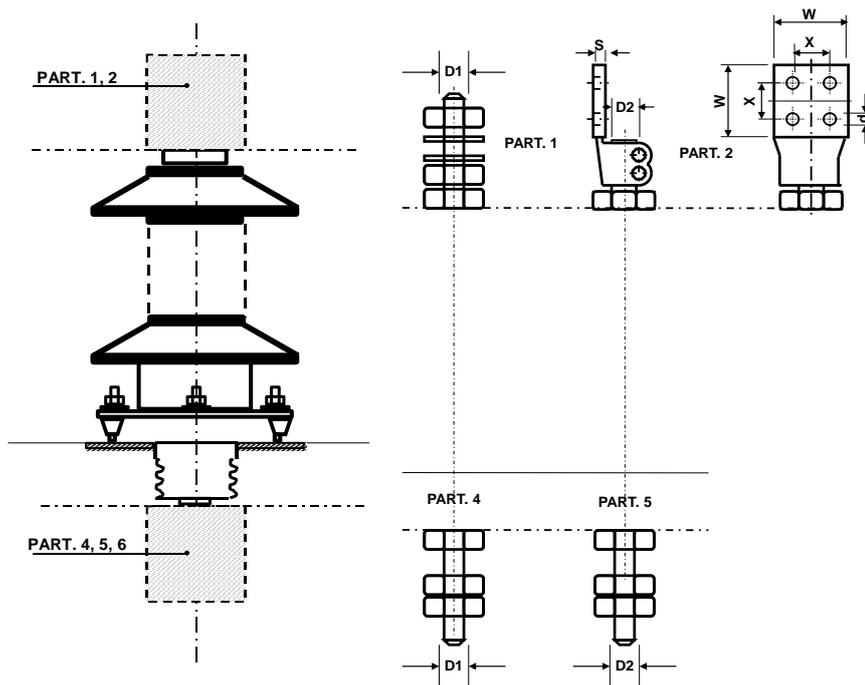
MV BUSHING TYPES AND DIMENSIONS
